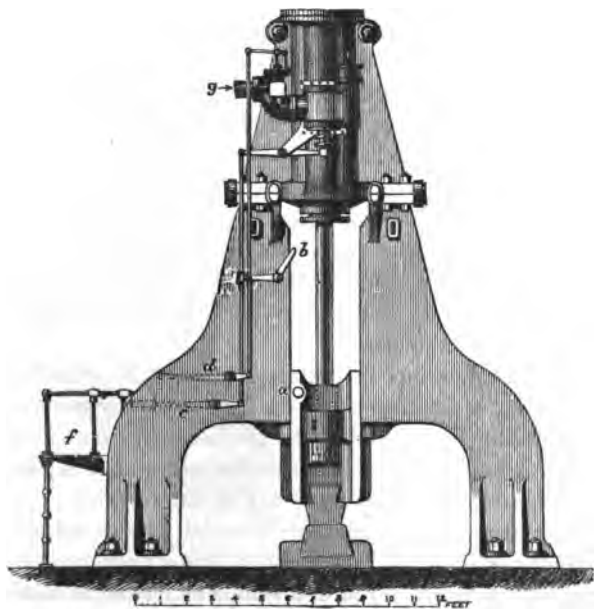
Thwaites and Carbutt's 8-ton double-acting steam hammer.
